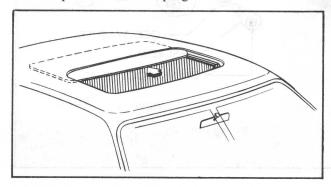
Exterior View (Sun Roof Partially Open)
